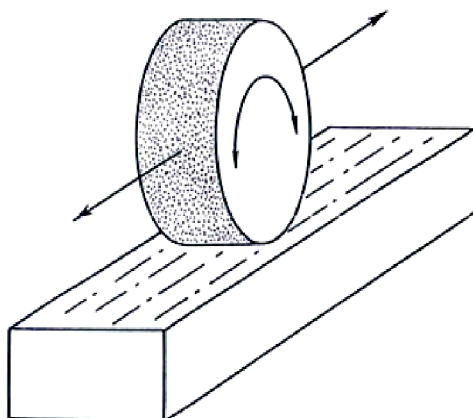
Surface Grinding Parallel to the Specimen Longitudinal Axis
